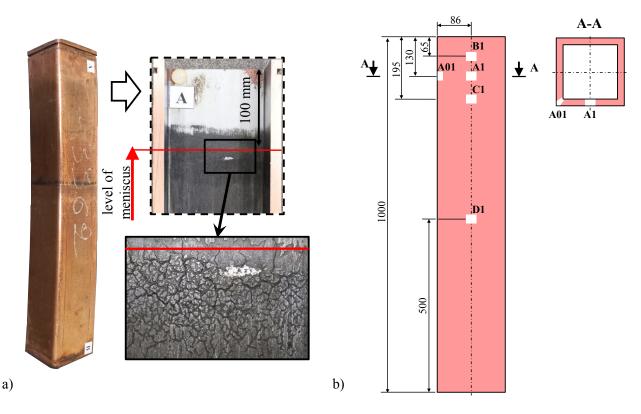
Mold under investigation with damaged inner surface (a), positions of extracted samples (b).
